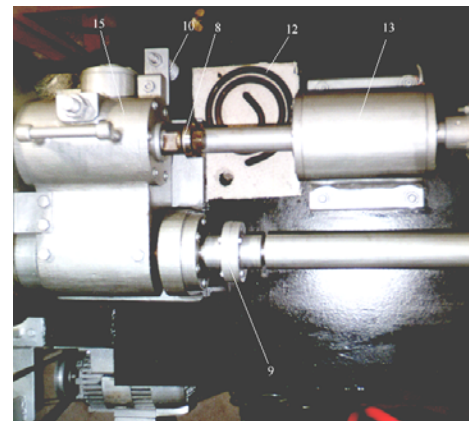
The working zone 8-up-roller; 10-limiting spring; 12-heating system; 13-ball bearings.
